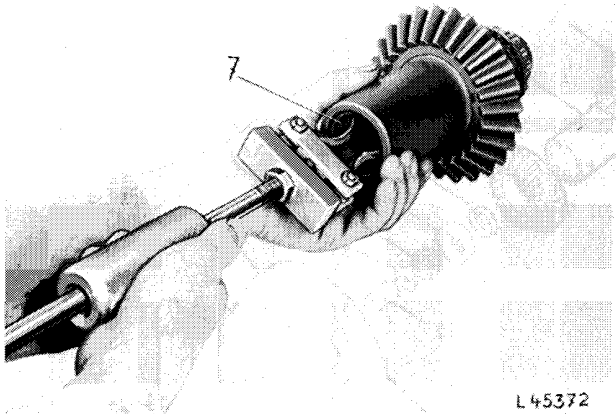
Removing Bearing Cup from Drive Gear Hub
